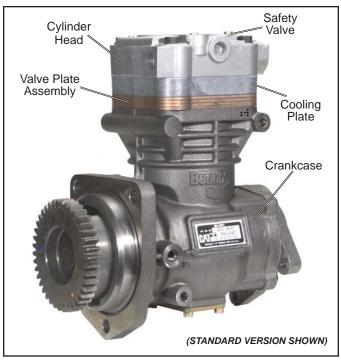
BENDIX® BA-921® COMPRESSOR
